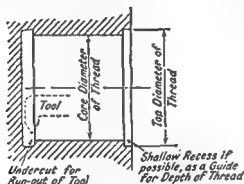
Preparation of Hole for Blind Internal Thread.
